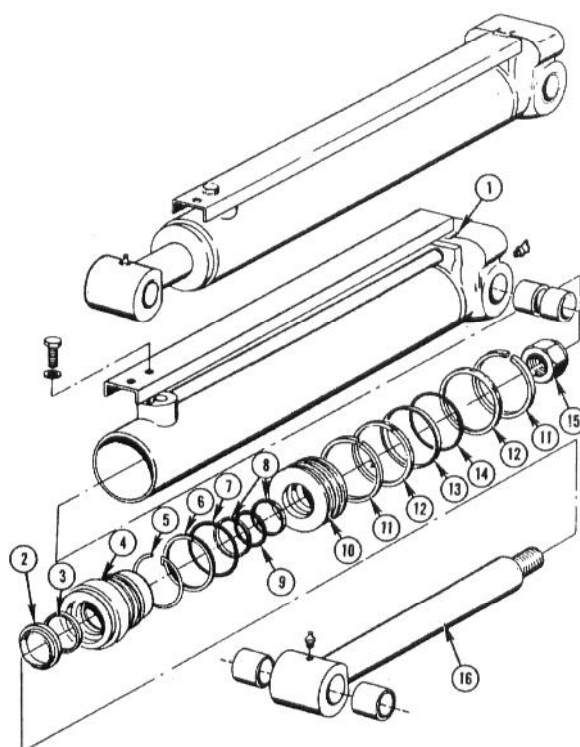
Identification of Parts Typical of MF Part Nos. 1605 022 M92 and 1605 176 M92
